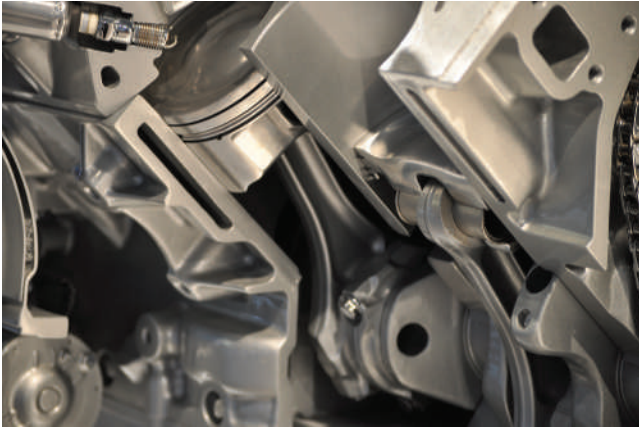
A cutaway showing the fit of the piston assemblies and crankshaft in an engine block.
